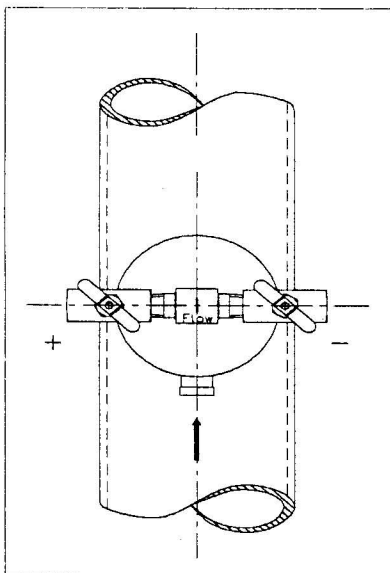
Placement of the differential pressure connecting studs for vertical pipe arrangement
